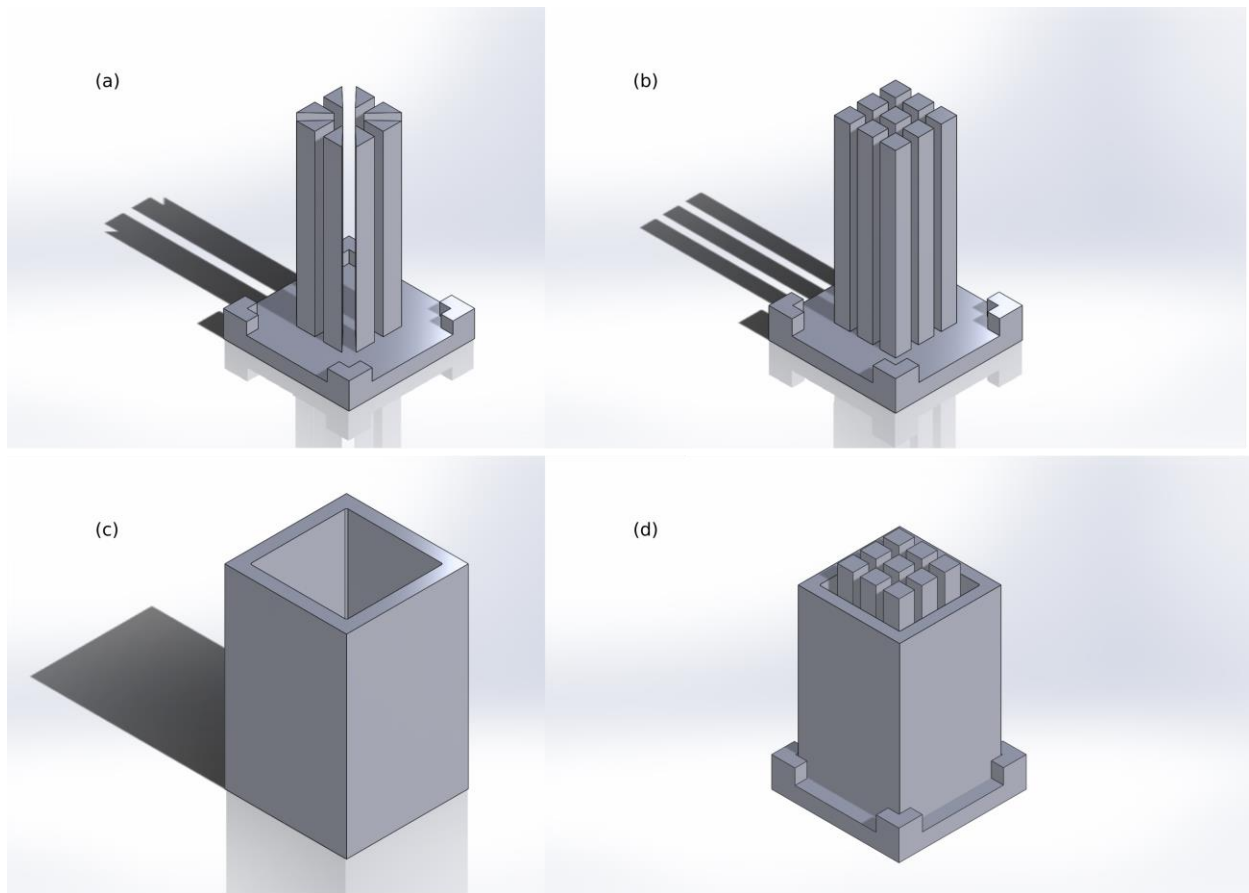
CAD screen shot of (a) tapered design base mold. (b) periodic voids design base mold. (c) shell mold. (d) assemble of base and shell.
